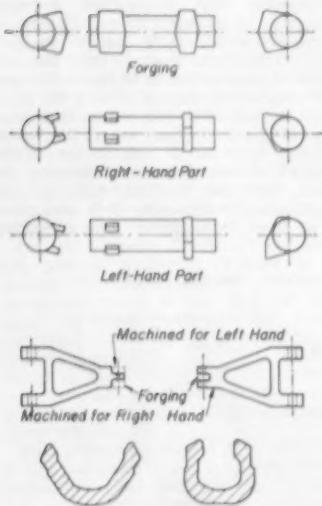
(Above) Design for Economy in Tooling. (Below) Combination of right-hand and left-hand parts in the same forging. Bottom pair shows an unforgeable part that was bent to its final shape after preliminary forging.
